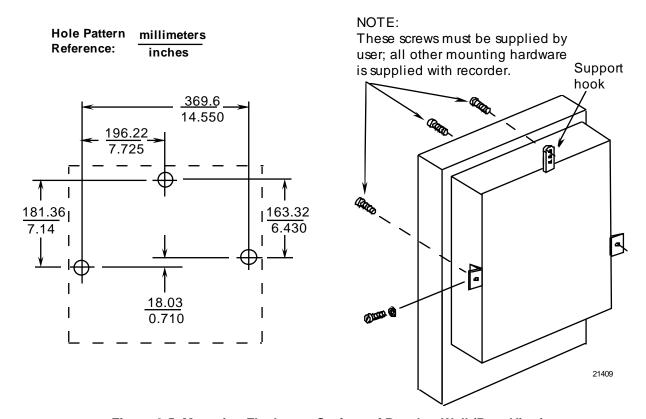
Mounting Flush on a Surface of Panel or Wall (Rear View)
